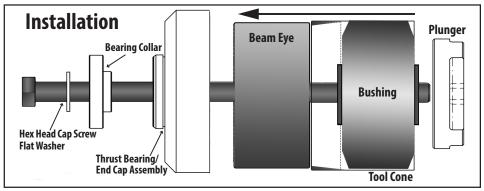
Lubricate outside of bushing, inside the beam eye and the inside of the tool cone before installation.
